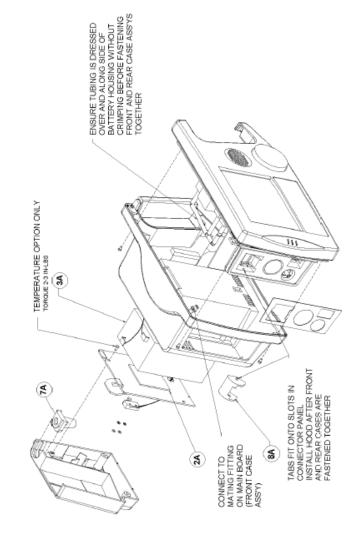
A1 Top Level Assembly Drawing (1 of 2)
